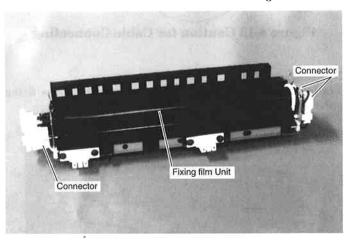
Disassembly Procedure (Fixing Film Unit)
